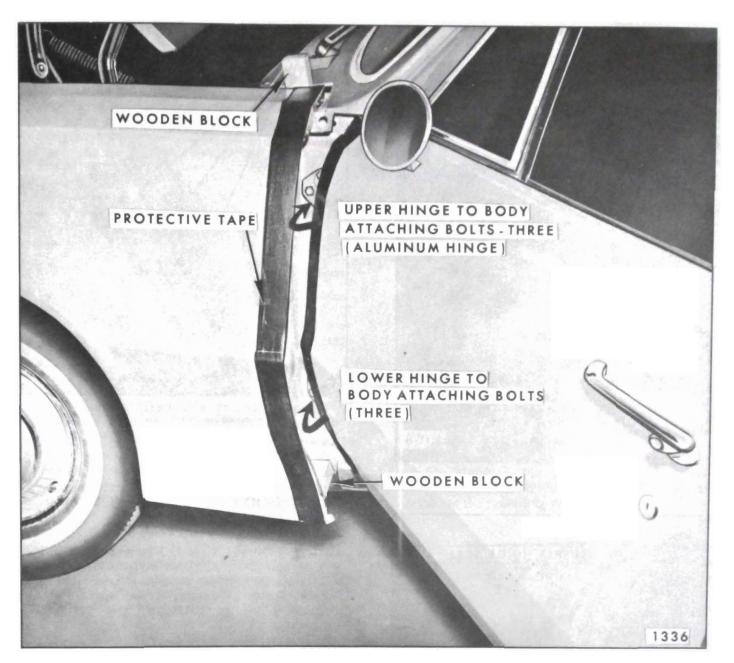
Front Door Hinge Attachment - "A" Styles
